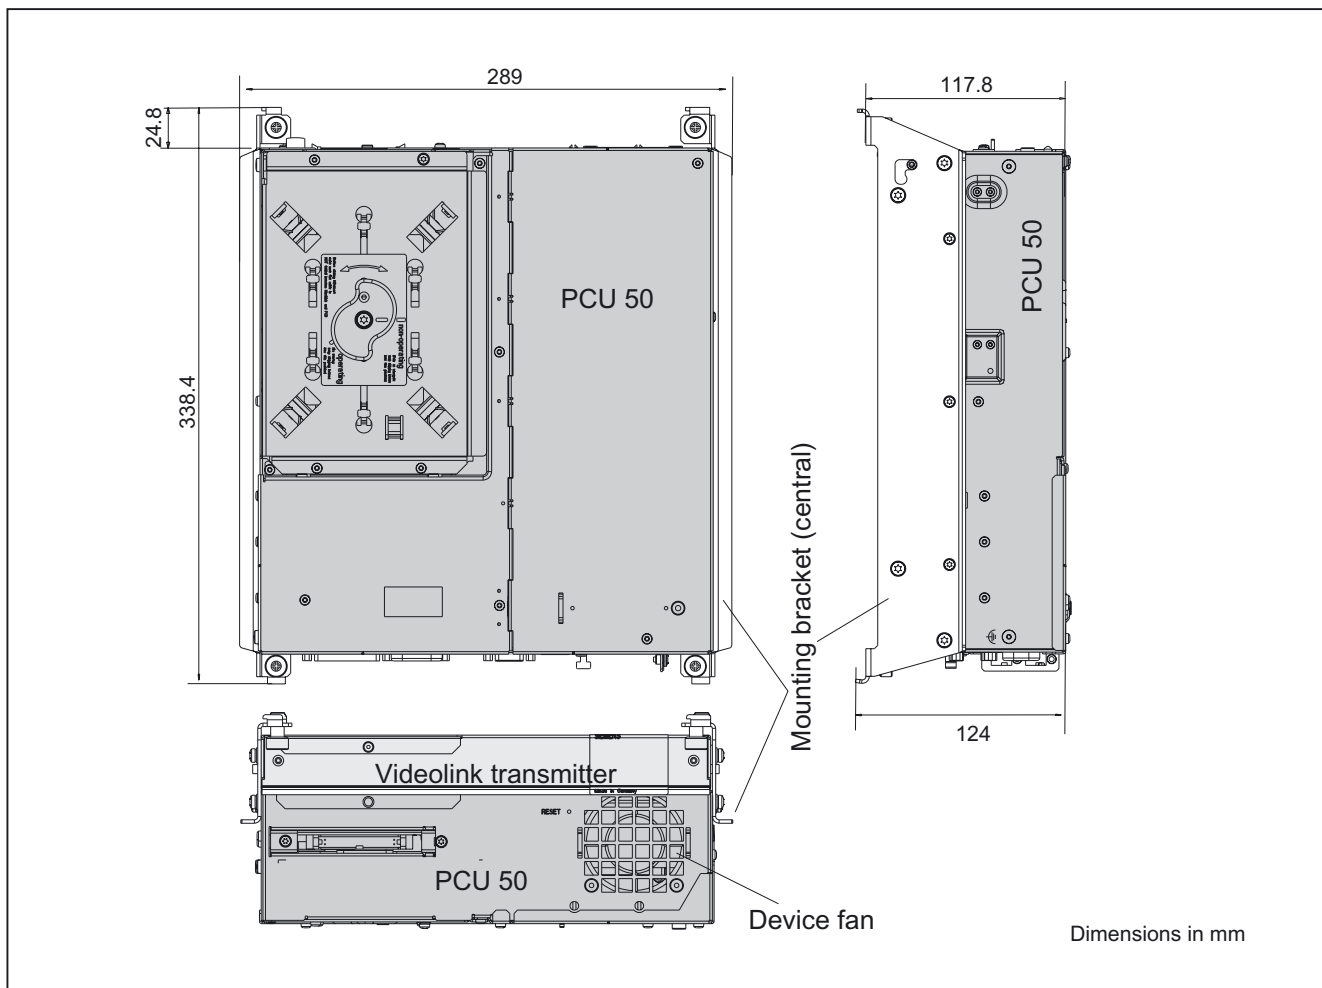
Joining of PCU 50 and videolink transmitter using the central mounting brackets to be attached to the operator panel front
